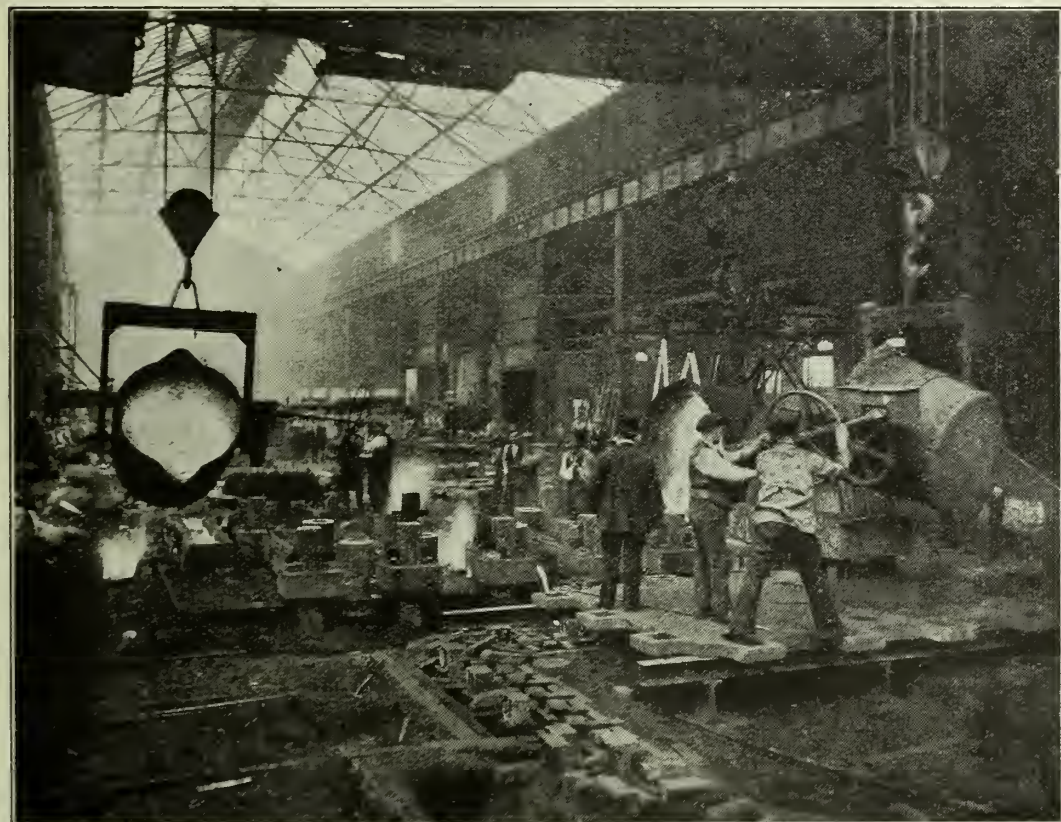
THE FINISH OF THE POURING OF A LARGE TURBINE CASTING—MESSRS. FRASER & CHALMERS.
